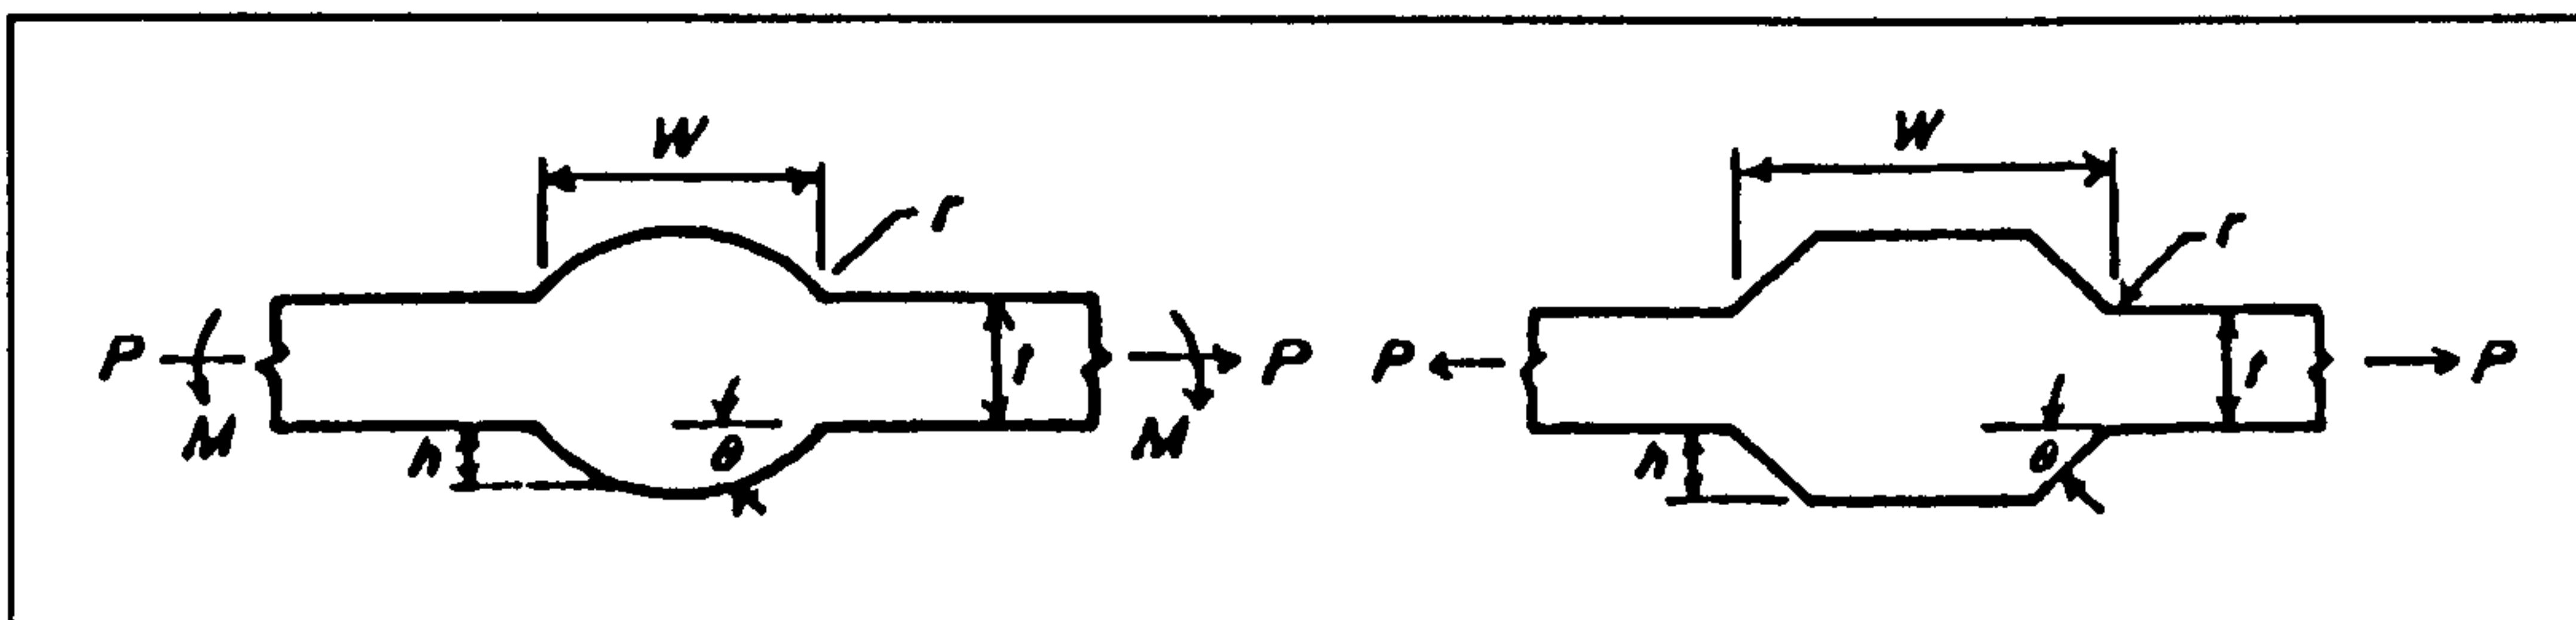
Weld geometry for calculation of SCF¹.
